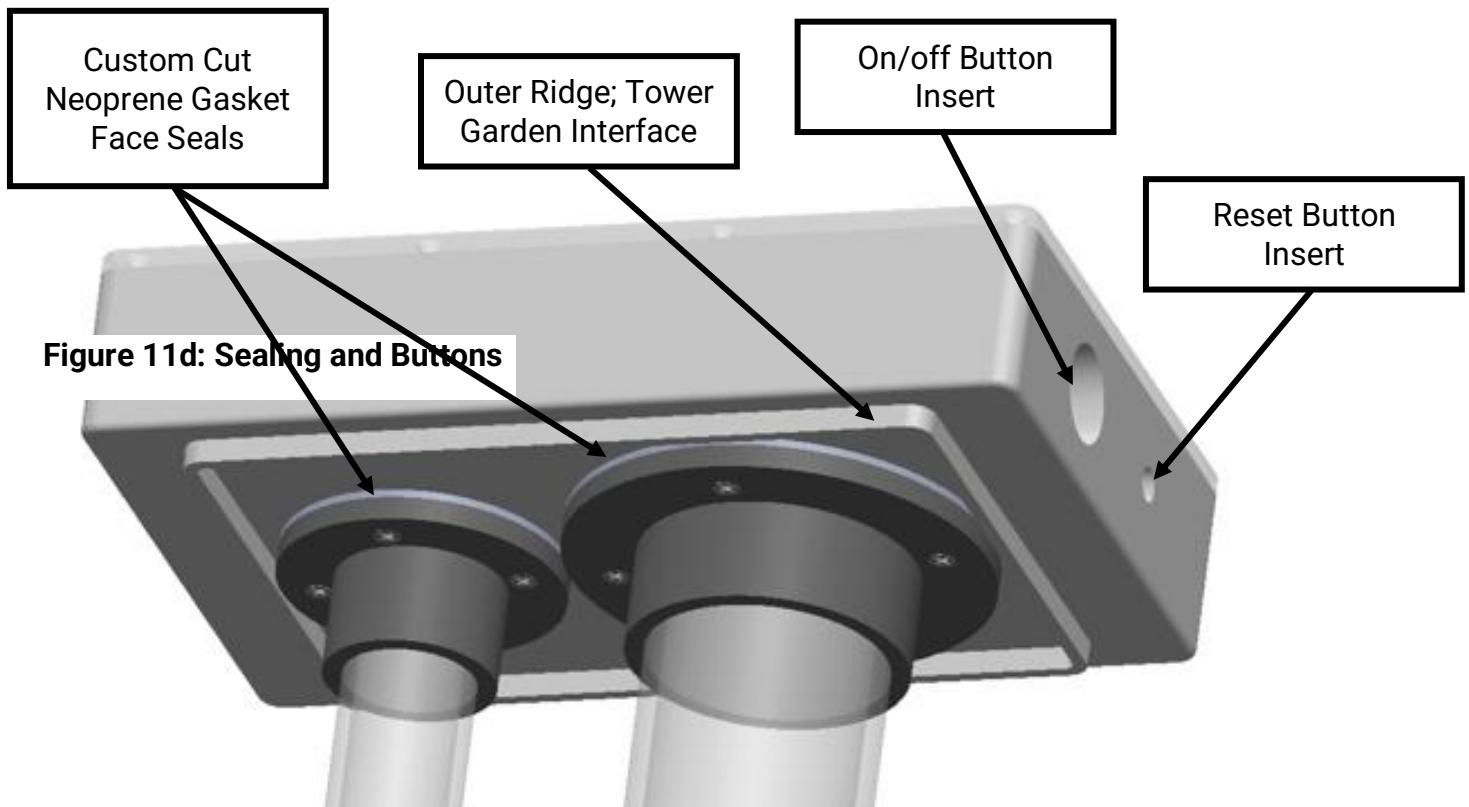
Labeled View of Prototype 1 Enclosure Cad Model
